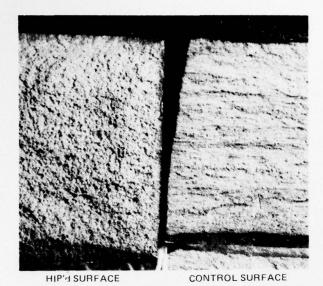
Fractographic Analysis (5x Mag) of K_{1c} Specimen
